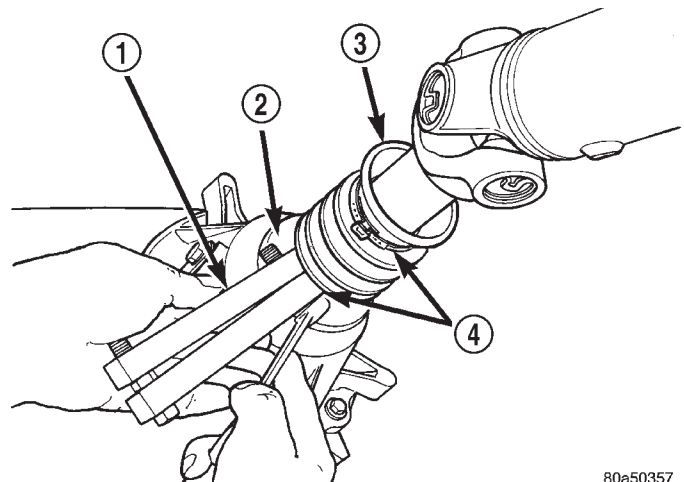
Driver Installer 8680 and Puller Screw from 8422
